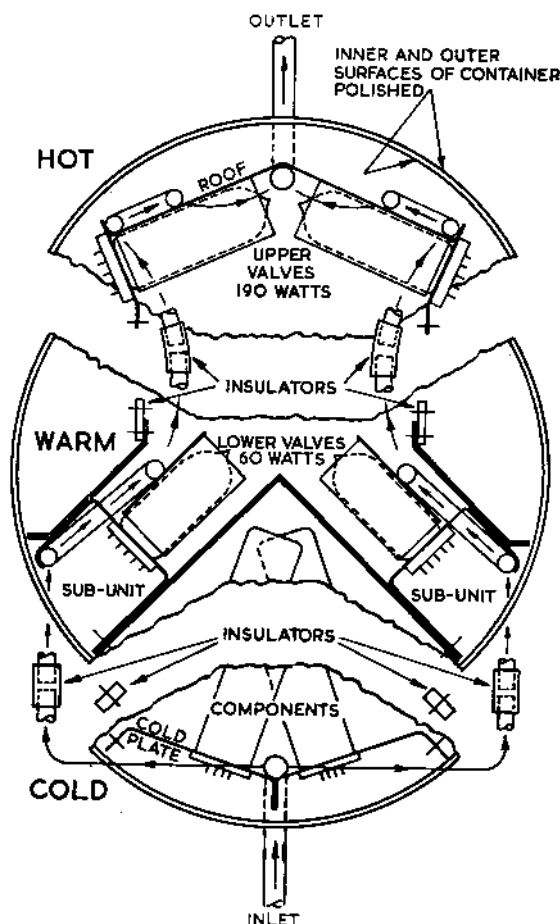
Sectional view of experimental assembly, 'exploded' to stress thermal segregation between hot, warm and cold portions
